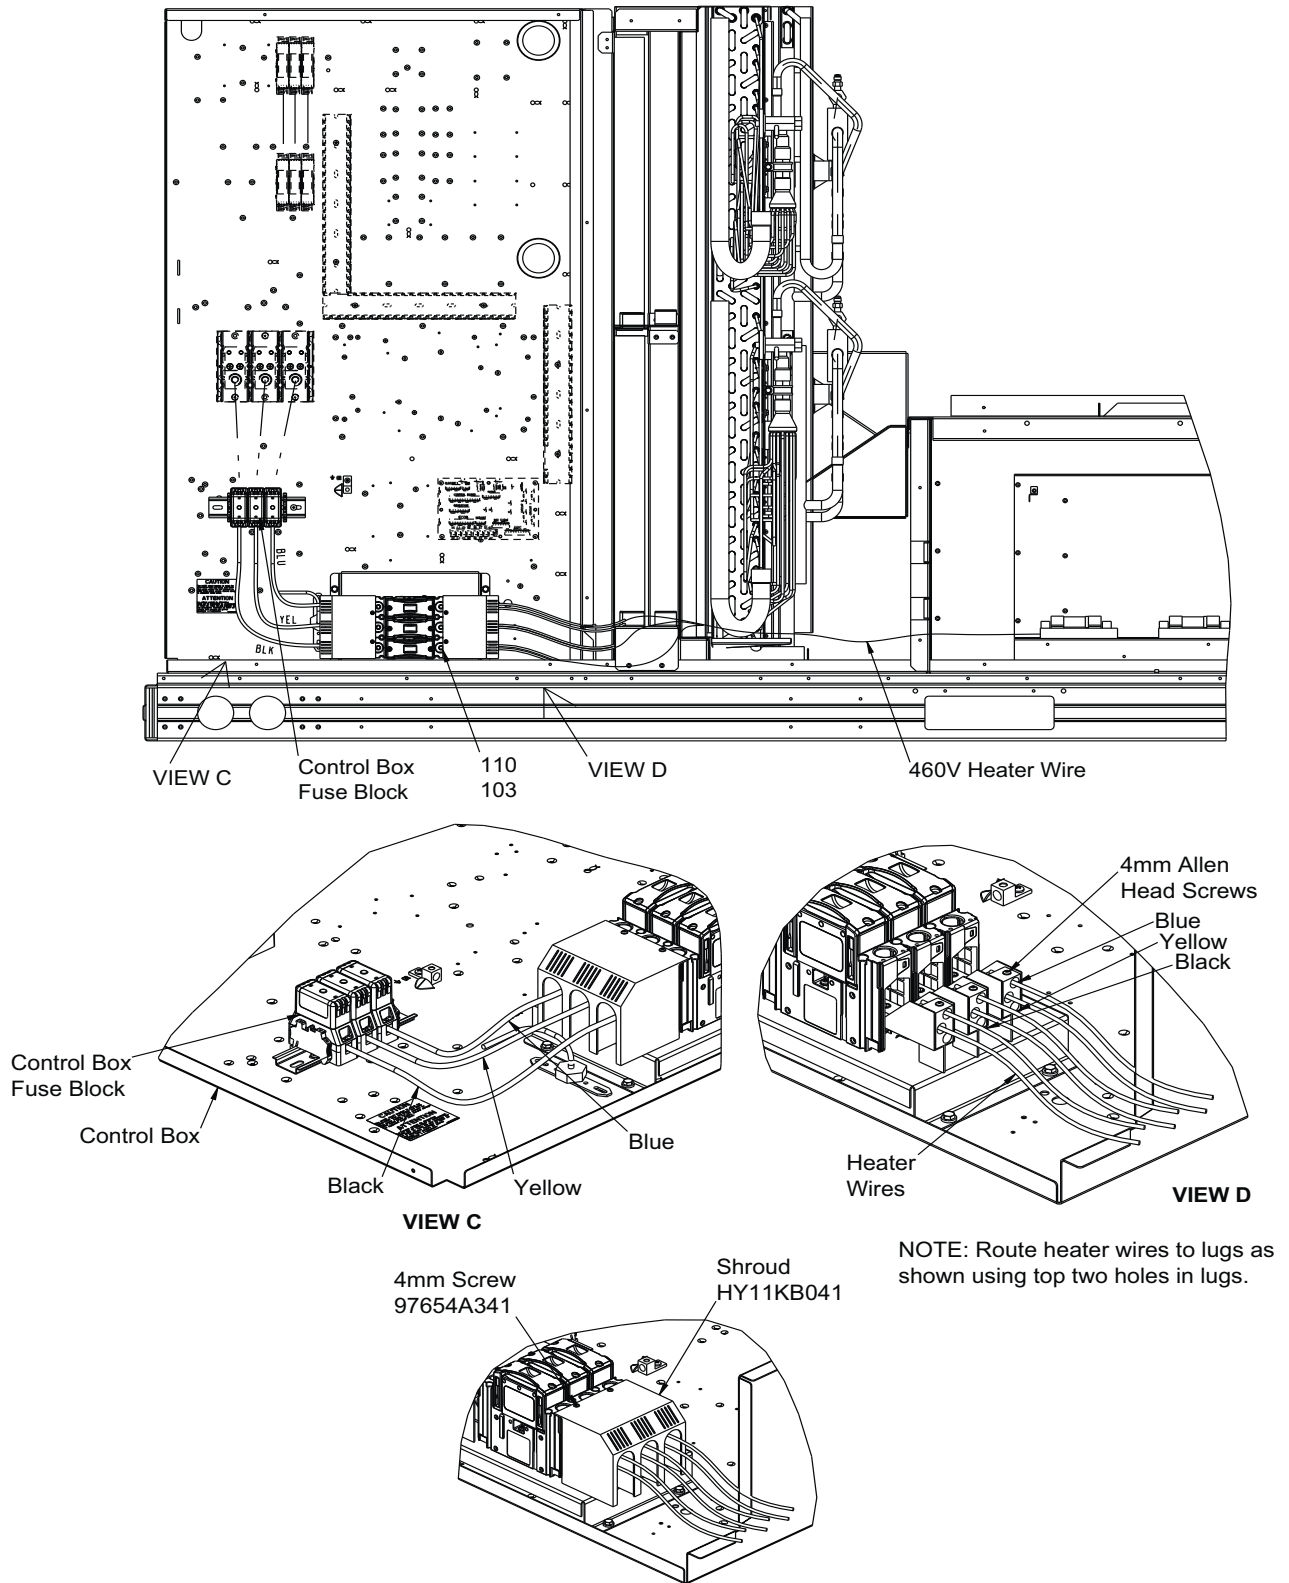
460V Single Point Power Assembly Location (High SCCR)
